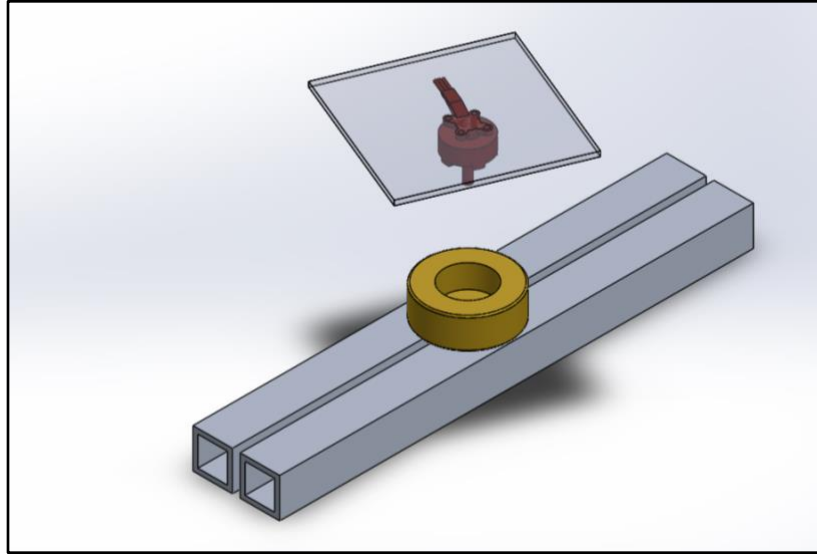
MOTOR SCREWED TO A PLATE AND ALIGNED WITH THE DISK BORE
